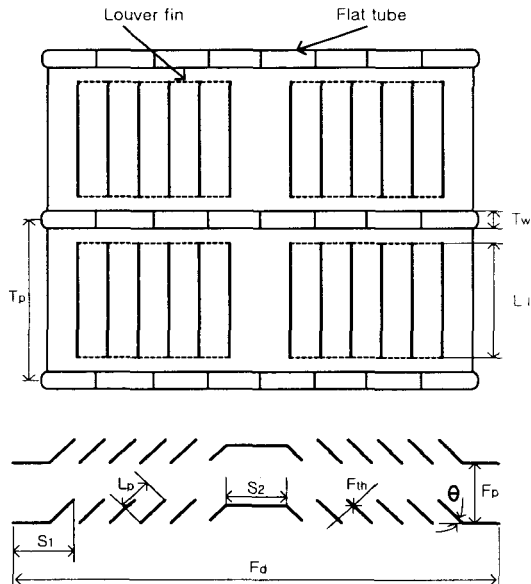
Louvered-fin geometry for the brazed heat exchanger.
